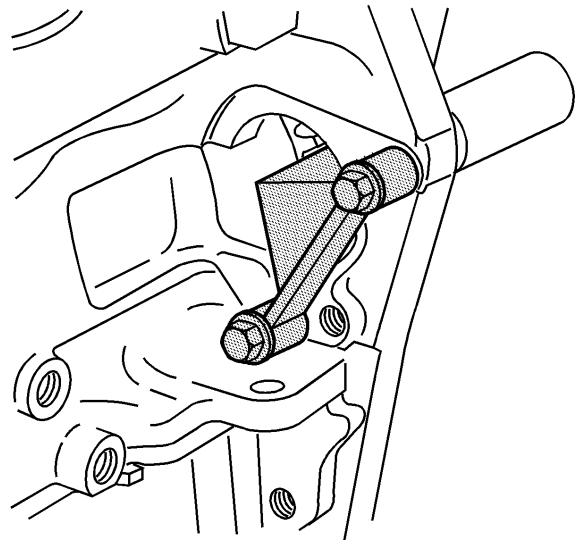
Identifying Special Tool - EN 46106 Courtesy of GENERAL MOTORS COMPANY
